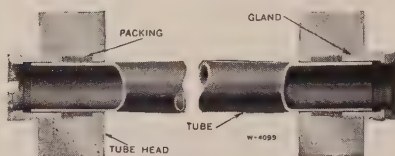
Condenser tube, and tube heads with stuffing boxes and glands.
